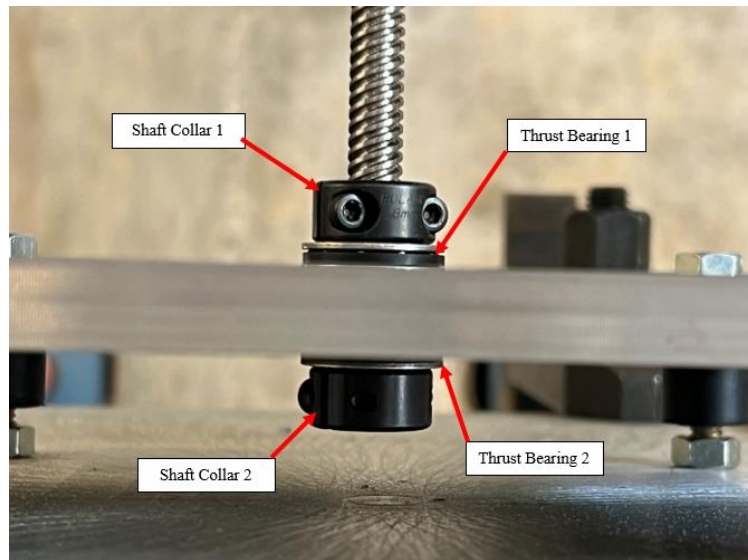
Thrust bearing and shaft collar used to secure the conventional RIM in the die set
